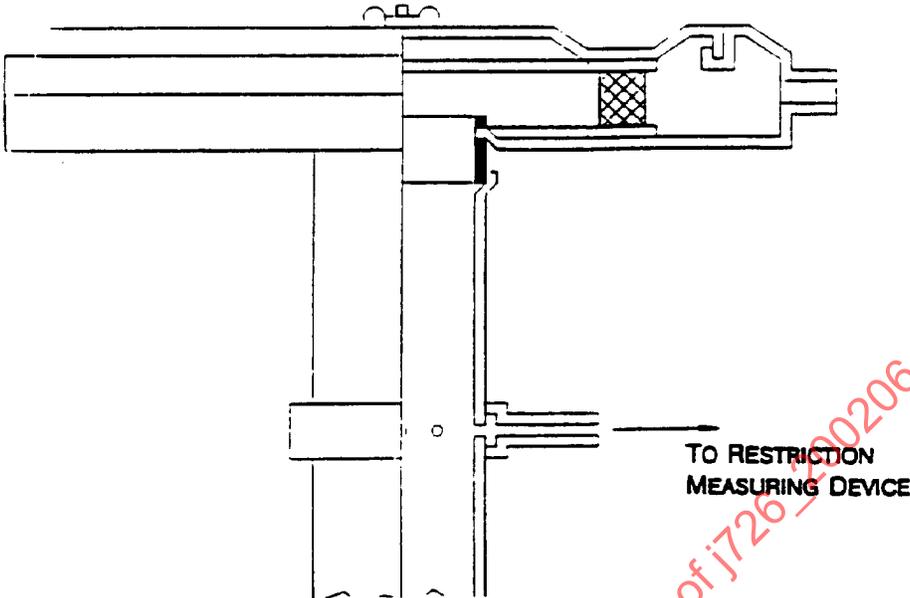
AIR CLEANER ASSEMBLY RESTRICTION TEST SETUP
